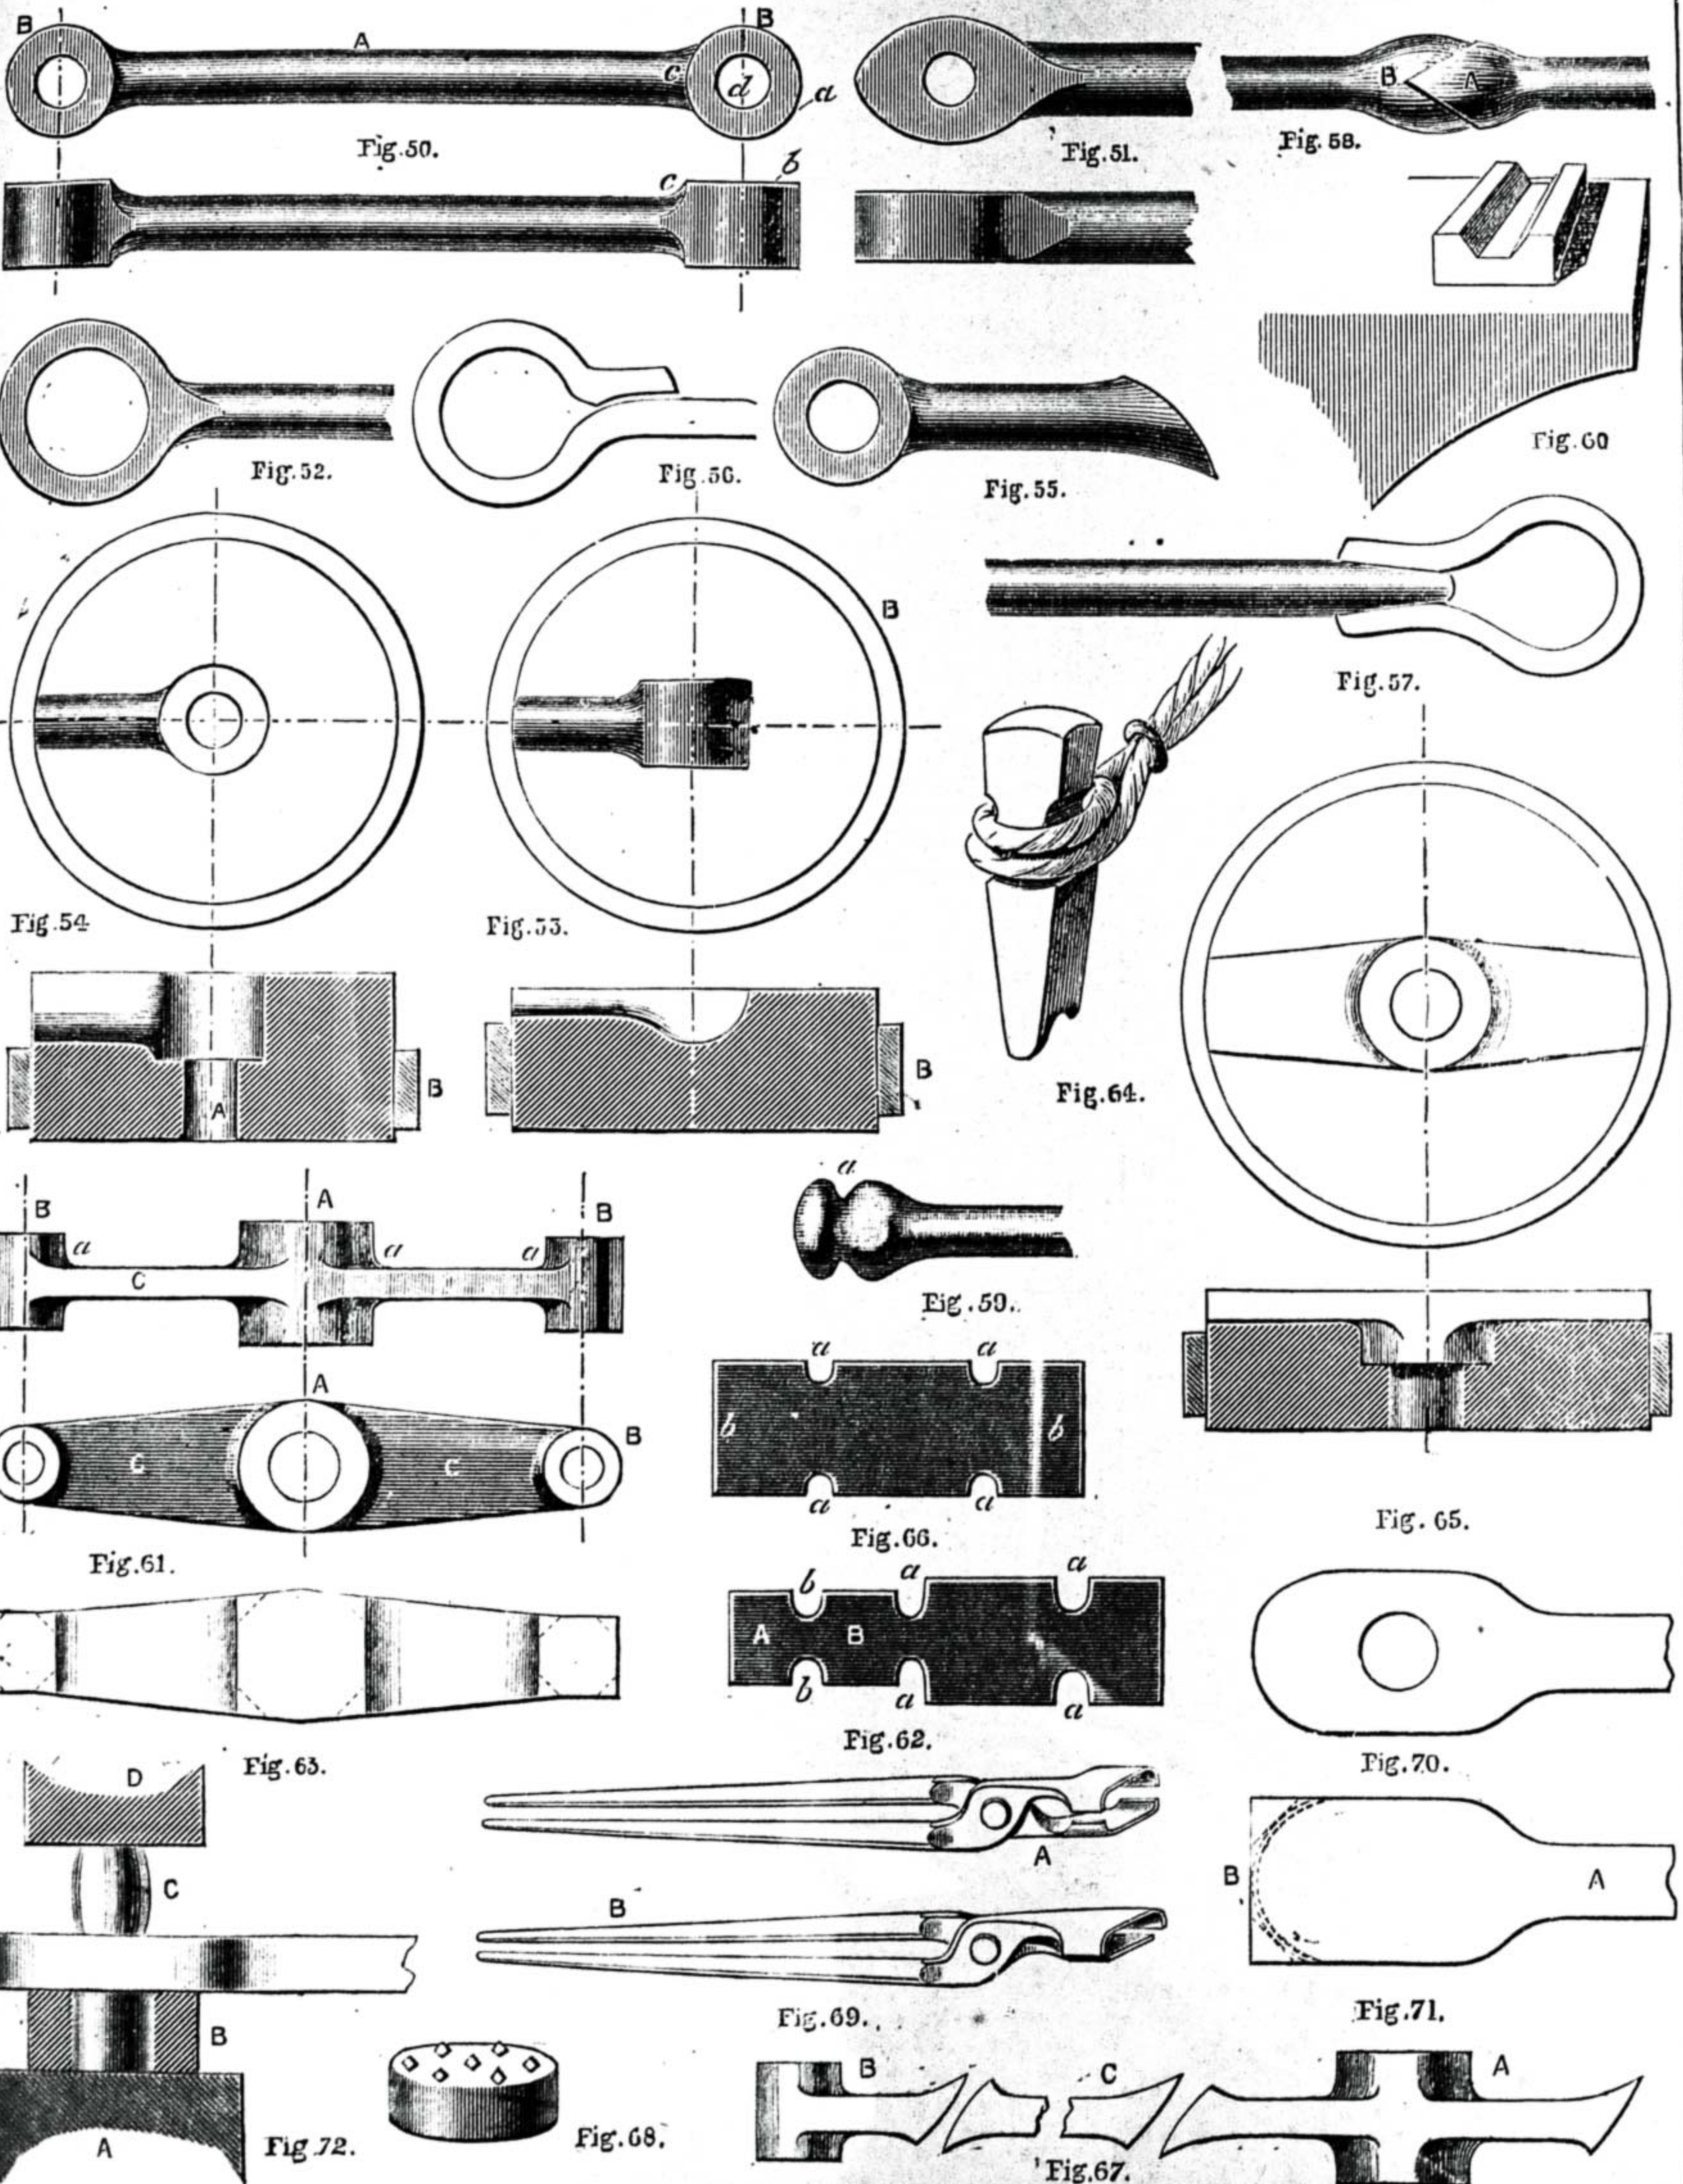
Rod or Link. Fig. 51.—Small Tie-Rod End. Fig. 52.—Large Truss or Tie-Rod End. Figs. 53, 54.—Die Blocks. Fig. 55.—Boss End scarfed for Welding. Fig. 56.—Eye turned round for Welding. Figs. 57, 58.—Tongued Joint. Fig. 59.—Fullered End for Tapering. Fig. 60.—Angular Swage in Anvil. Fig. 61.—Double ended Lever. Fig. 62.—Fullered Lump. Fig. 63.—Lever roughly forged. Fig. 64.—Hollow Fullering Tool. Fig. 65.—Die Block. Fig. 66.—Fullered Lump. Fig. 67.—Bosses and Rod scarfed for Welding. Fig. 68.—Boss Lump prepared for dabbling on. Fig. 69.—Tongs for flat Bars. Fig. 70.—Tie-Rod End. Fig. 71.—Rough Forging for ditto. Fig. 72.—Punching Hole in Tie-Rod End.
